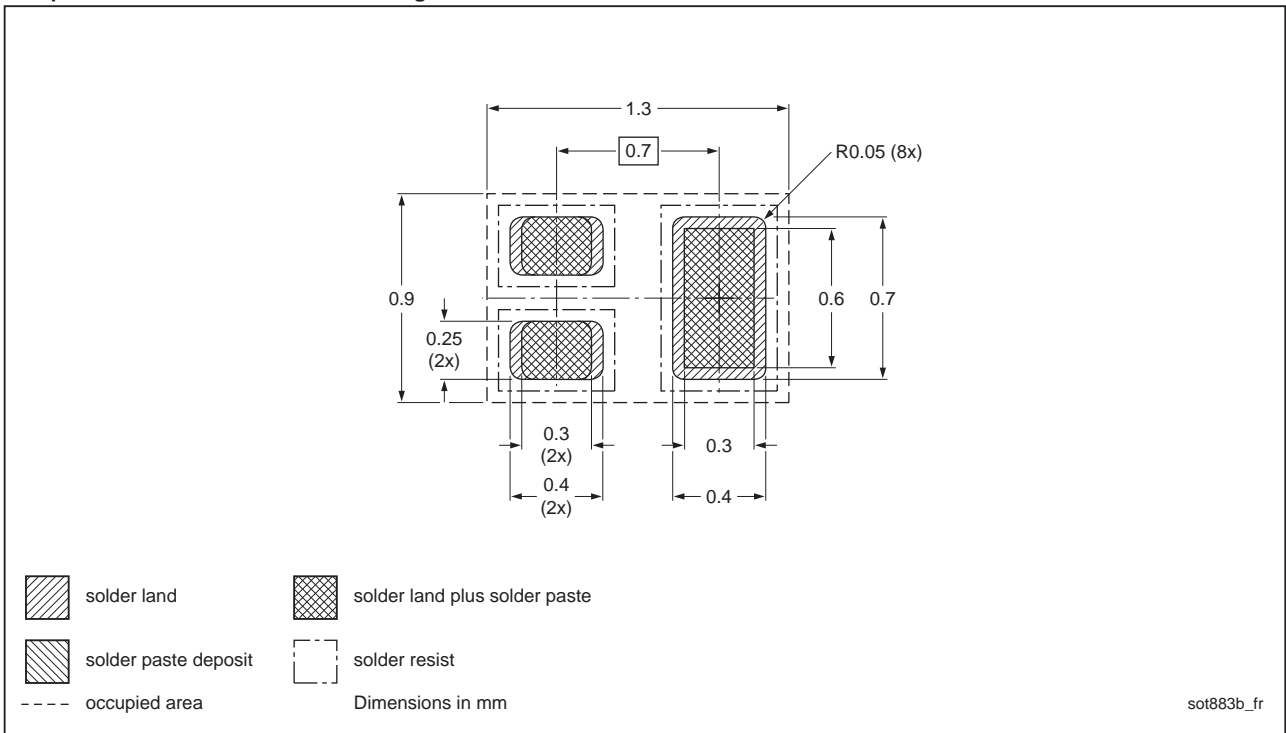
Reflow soldering footprint for SOT883B (DFN1006B-3)
